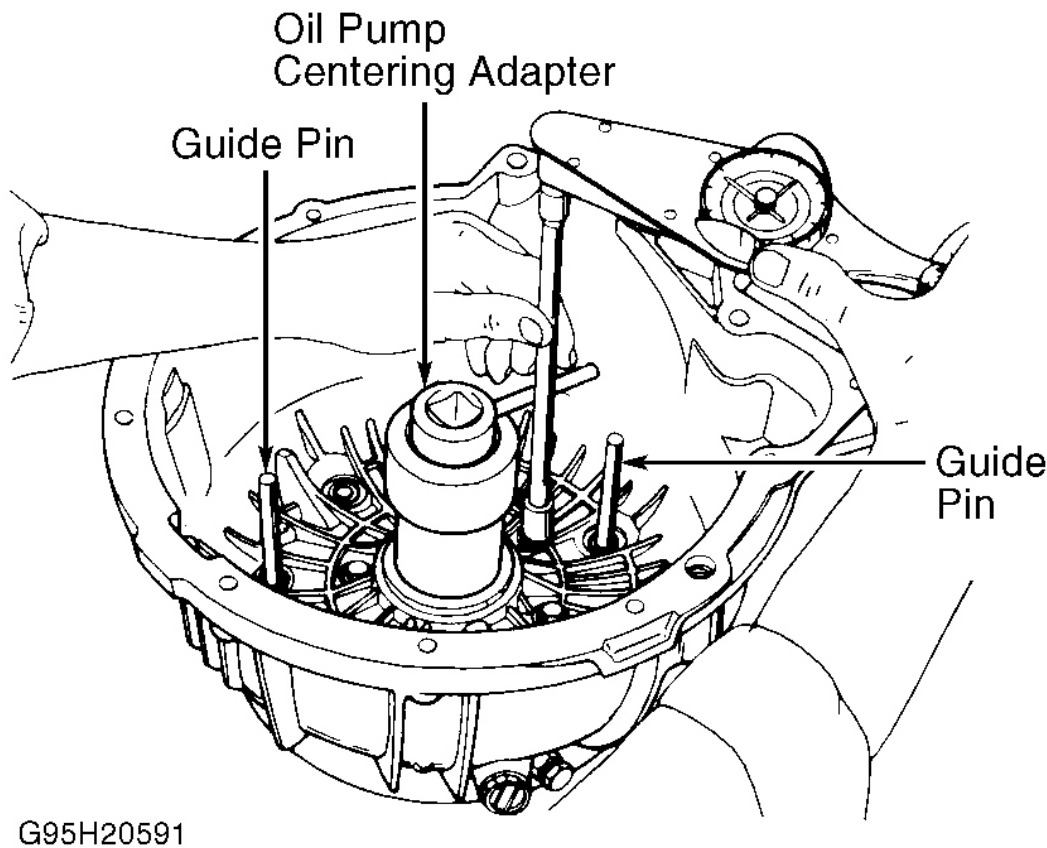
Installing Torque Converter Housing On Oil Pump Assembly
